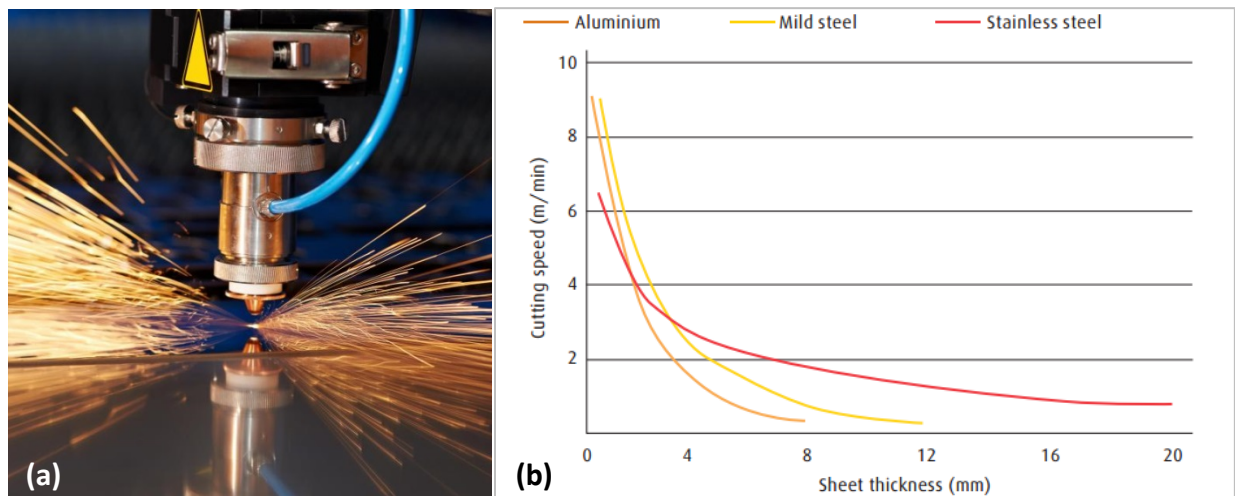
11: Laser cutting: (a) Laser cutting of sheet metal (LabcoWelding, 2013) (b) Typical cutting speeds for aluminium, mild steel and stainless steel using a 3 kW laser (Berkmanns and Faerber, 2008)
